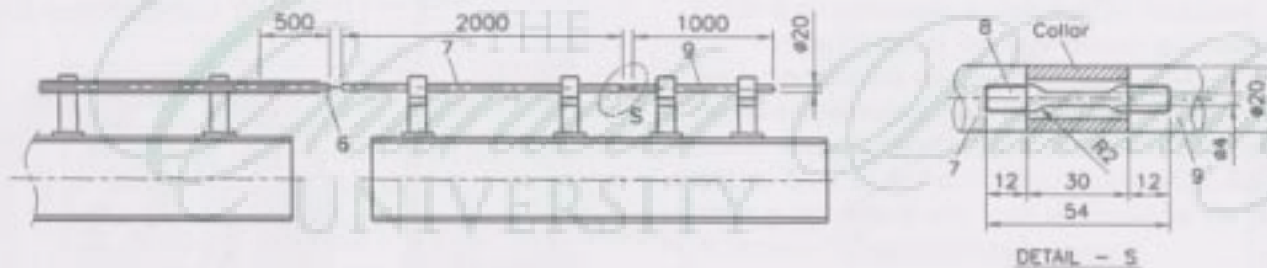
Details arrangement of Split Hopkinson Pressure Bar
